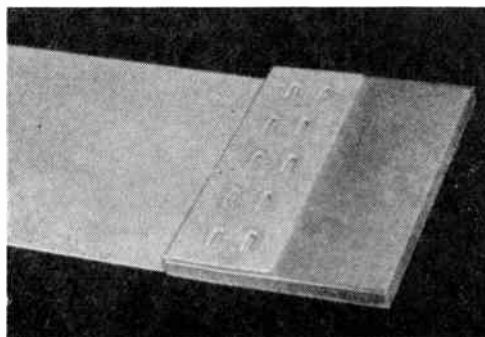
Cold Pressure Weld between two pieces of aluminium of differing thickness.
